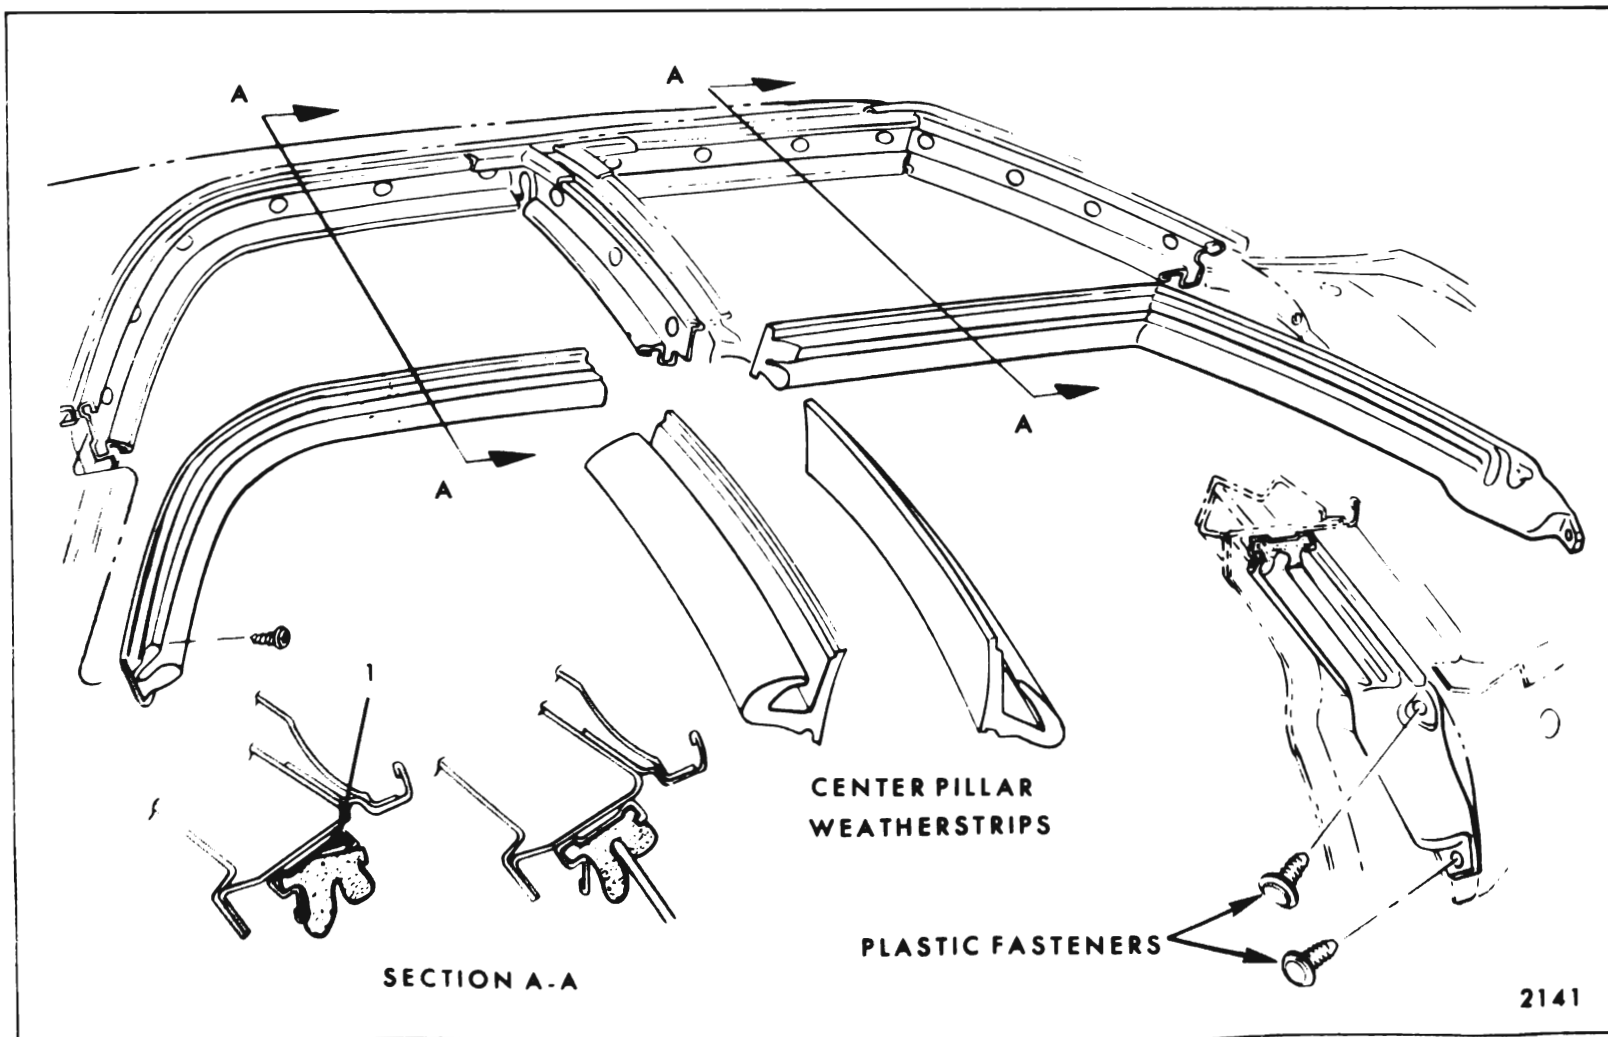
Side Roof Rail and Center Pillar Weatherstrips - "C-69" Styles
